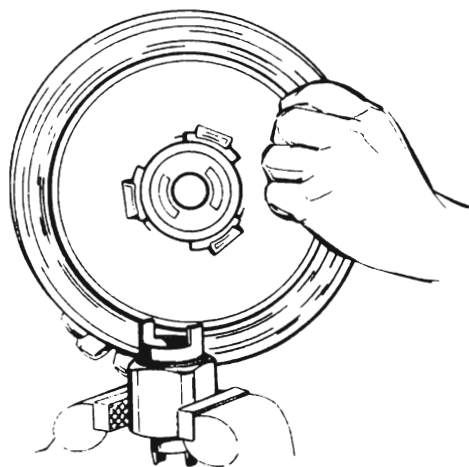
Positioning Primary Power Piston In Tool J-23101 (Small Dia. End Up) Mounted In Vise
